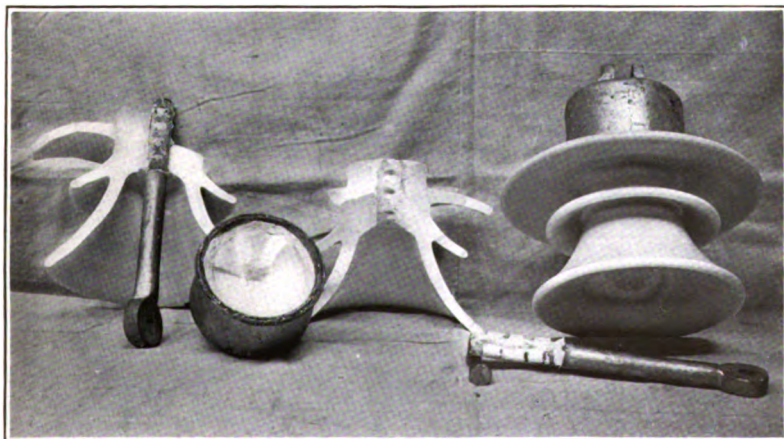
TYPE C—FRACTURES OCCURRED AT 15,000 LB.
